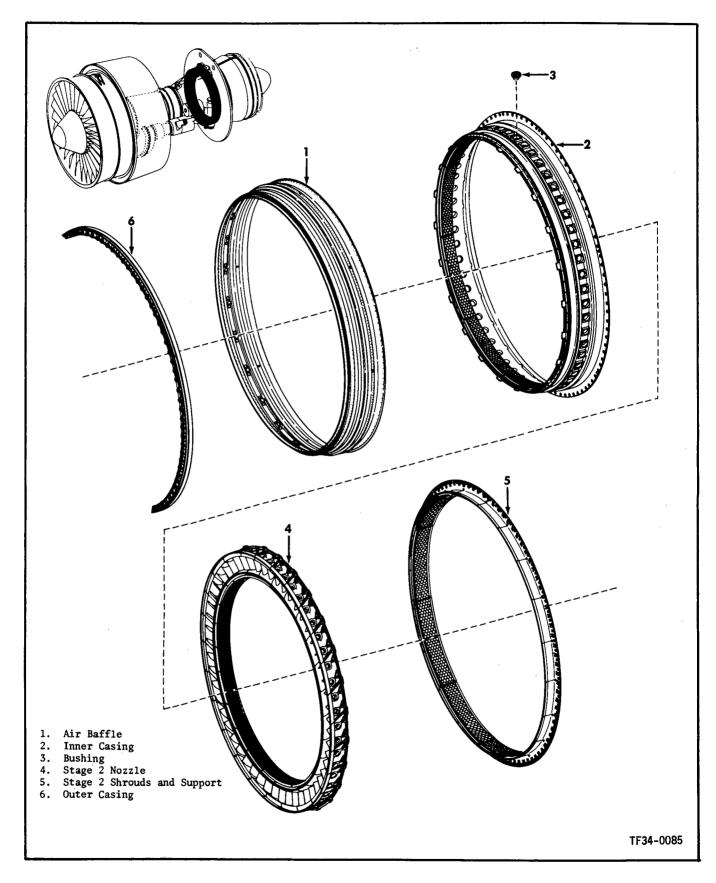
Installation of Stage 2 Nozzle Assembly
